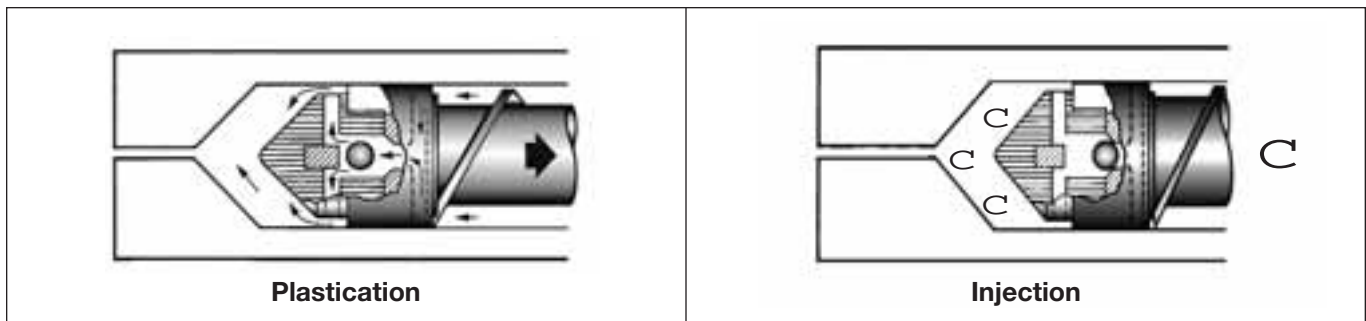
Internal Ball Check Nonreturn Valve Used on Reciprocating Screw Injection Molding Machines
